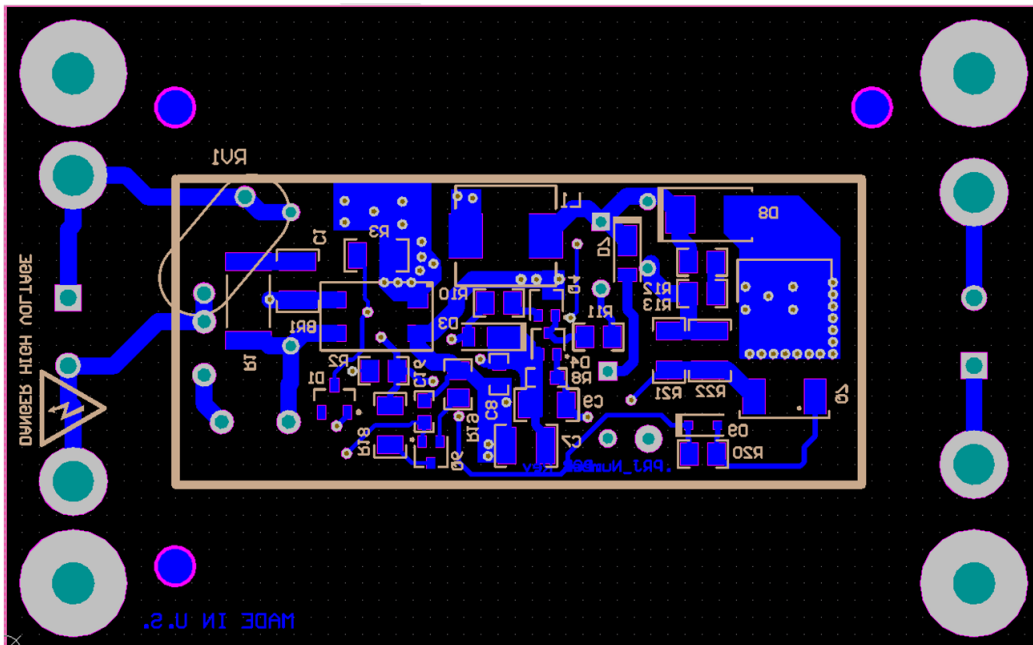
LM3445EVM-695 Bottom Assembly Drawing (Bottom View)
